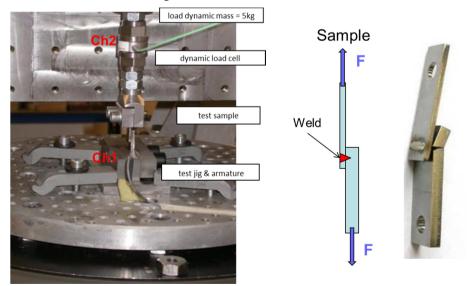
Test setup on shaker, Test overlapped sample, Fatigue damage of sample
